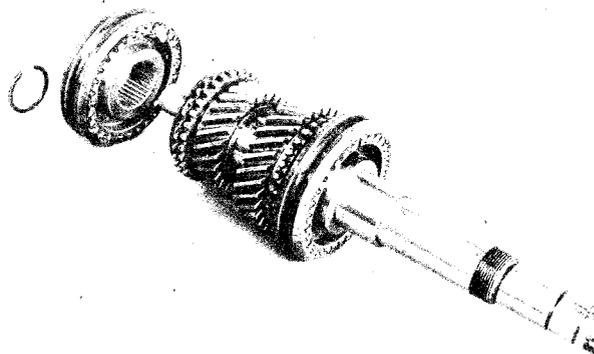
A-47 Installing clutch hub assembly (3rd & 4th)
